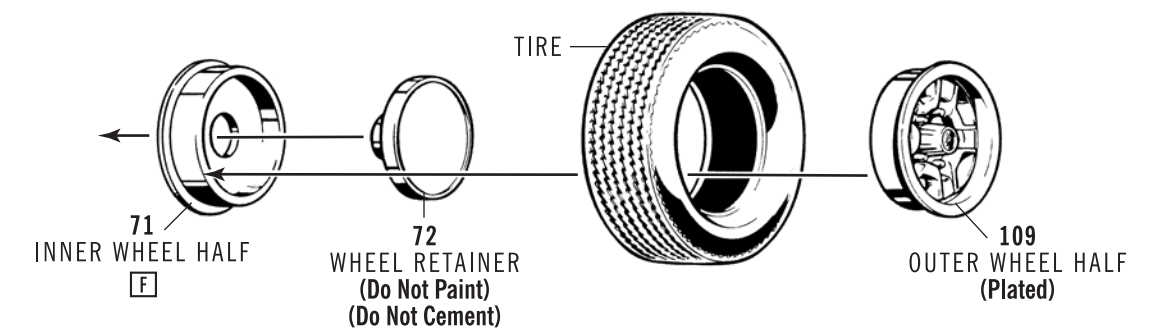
CUSTOM FRONT WHEEL ASSEMBLY
